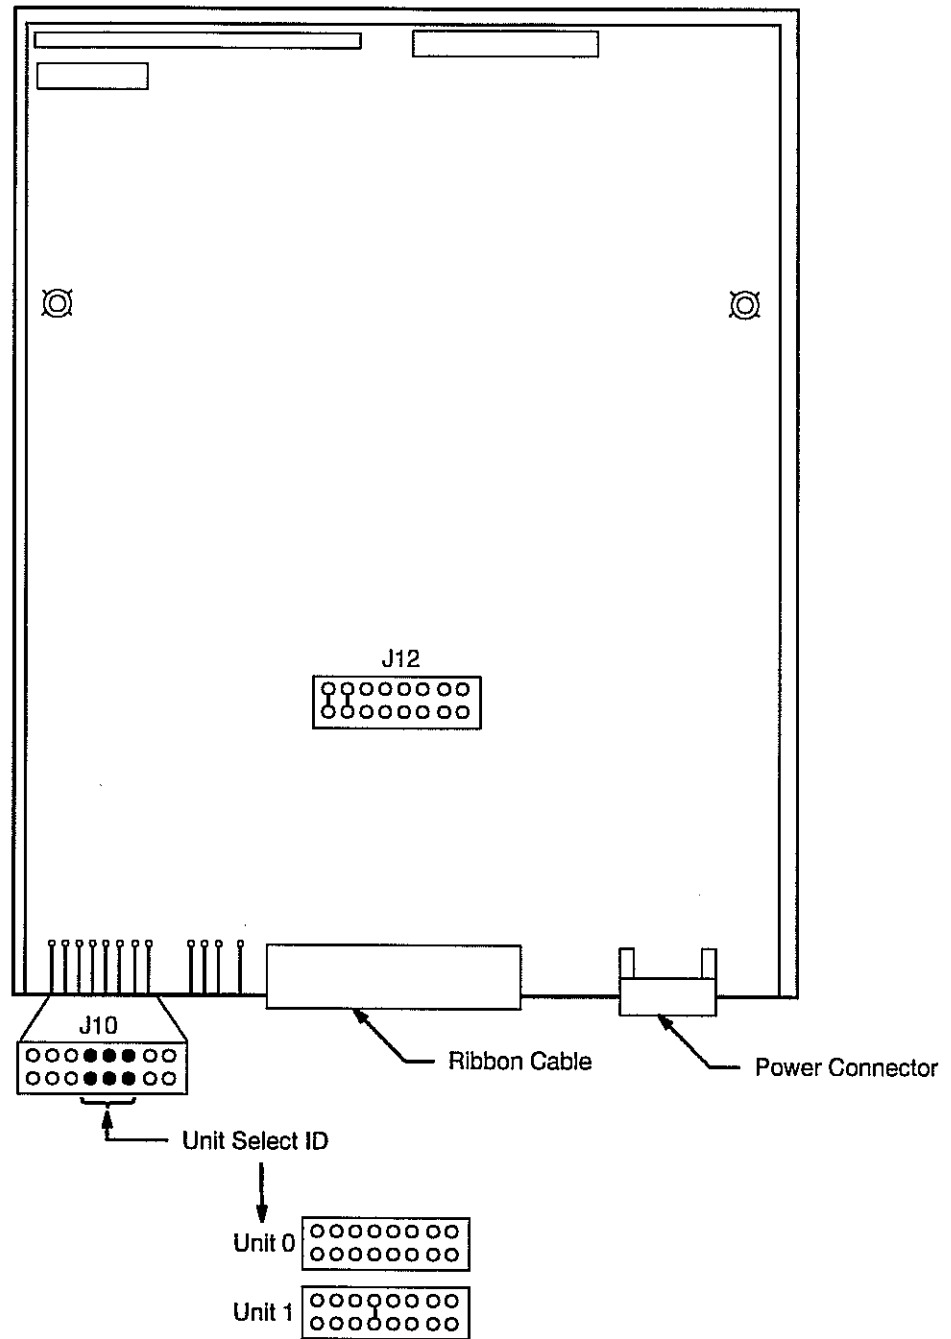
DC-5I Board Jumpers (Controller 0)
